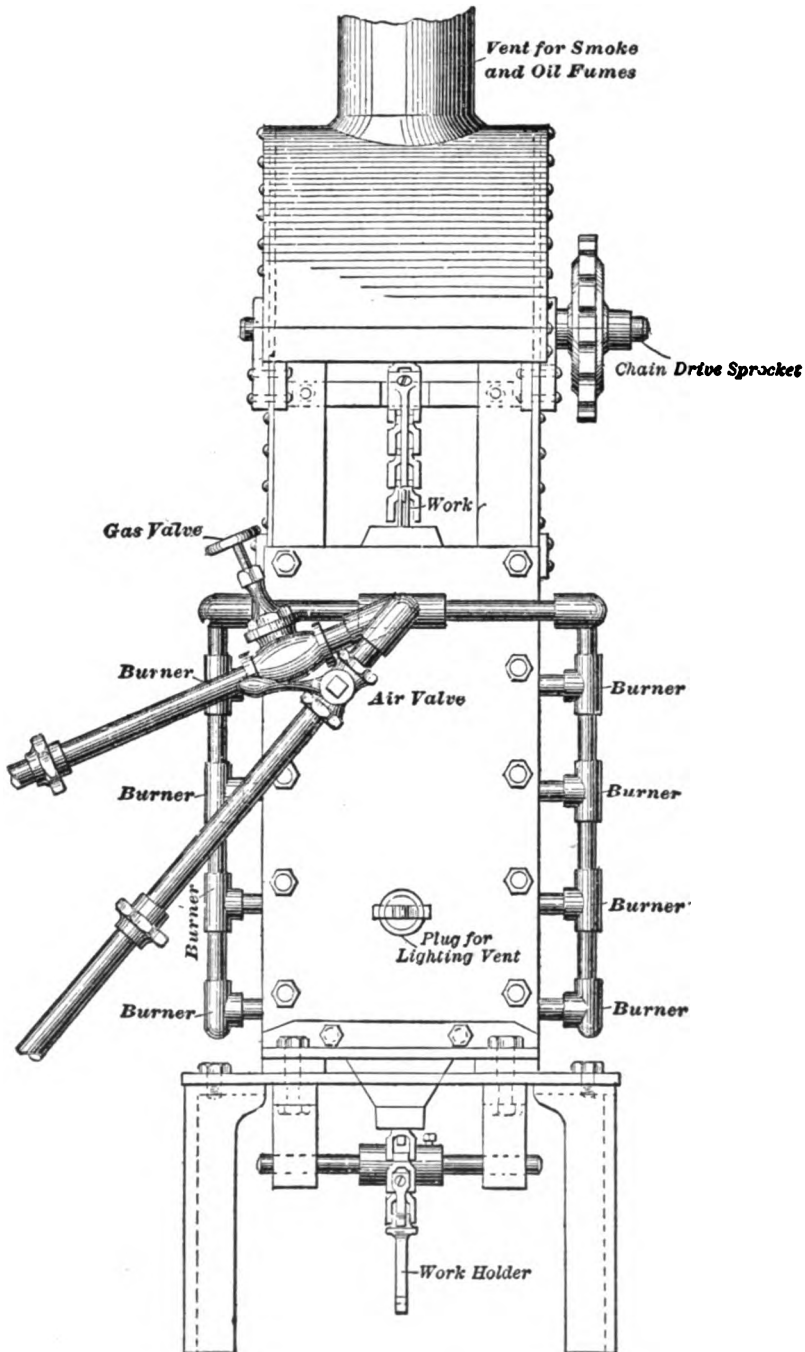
Automatic Hardening Machine for Wedge Slides.
